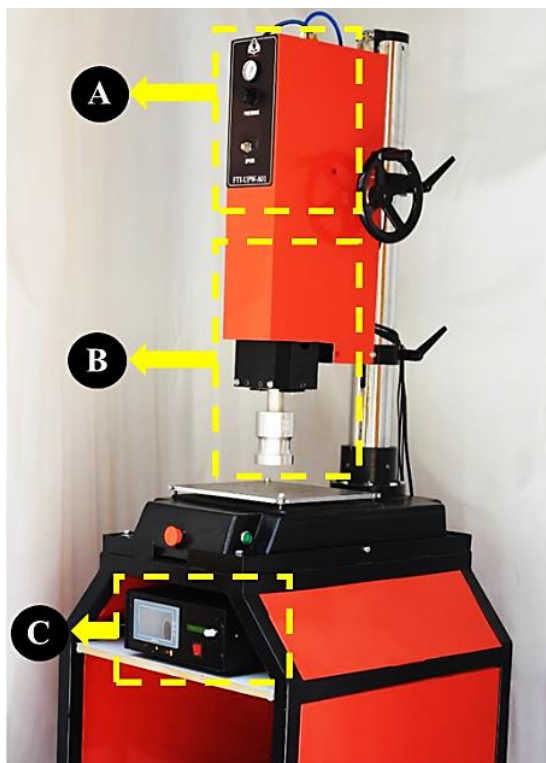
The polymer ultrasonic welding device and polymer base composites used in this research, A) pneumatic actuator, B) vibration set including transducer, booster and horn, C) power source and controller
